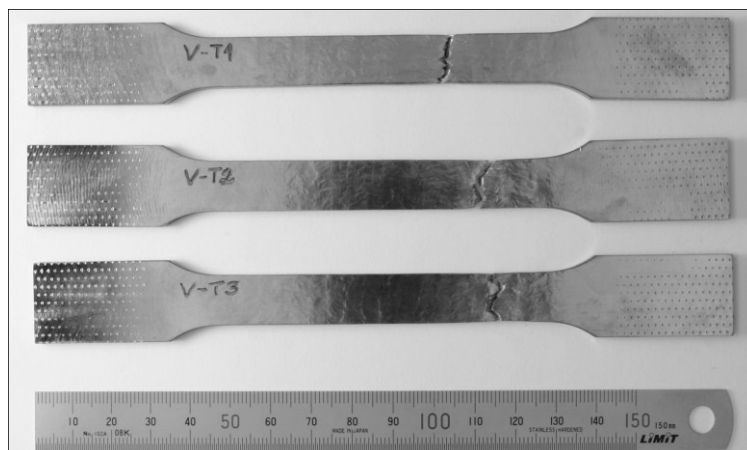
Location of fracture in tensile specimens machined from WAAM Ti-6Al-4V walls (labelled V) with their longitudinal axis perpendicular to the welding direction.
